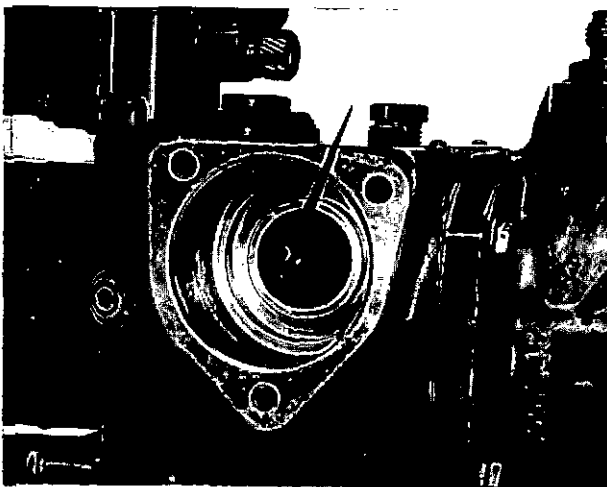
, The AFC Barrel plug with the puller capscrew installed.
